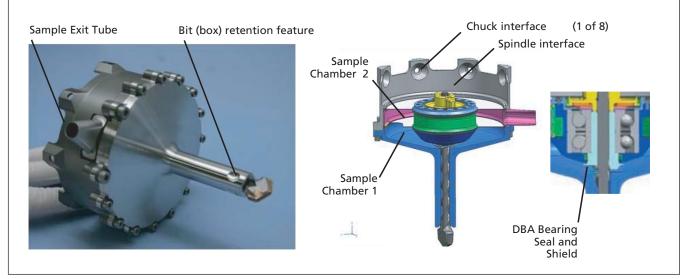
The Drill Bit Assembly (left) and Sample Paths and Interfaces (right) for the DBA.
